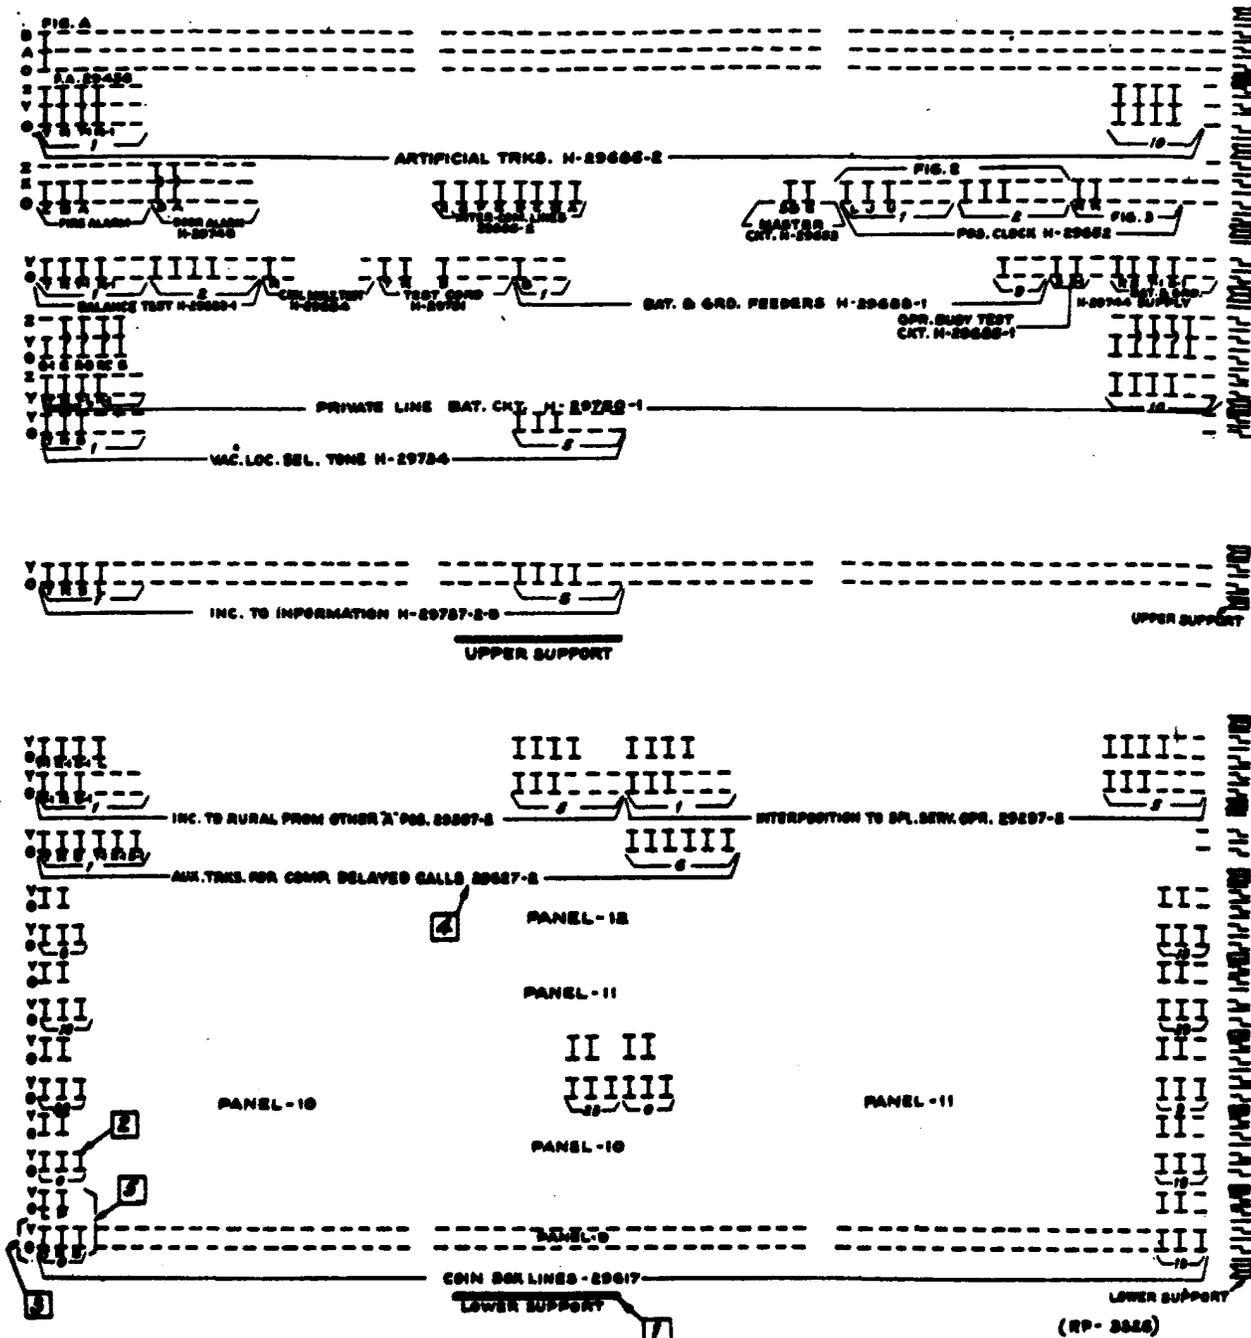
TYPICAL RELAY RACK TERMINAL ASSEMBLY DRAWING
